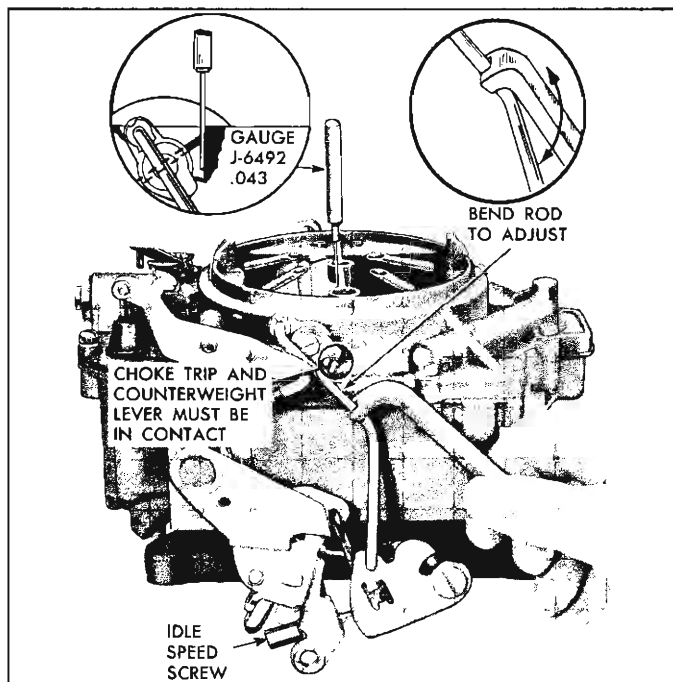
Checking and Adjusting Fast Idle Cam and Choke Relationship
